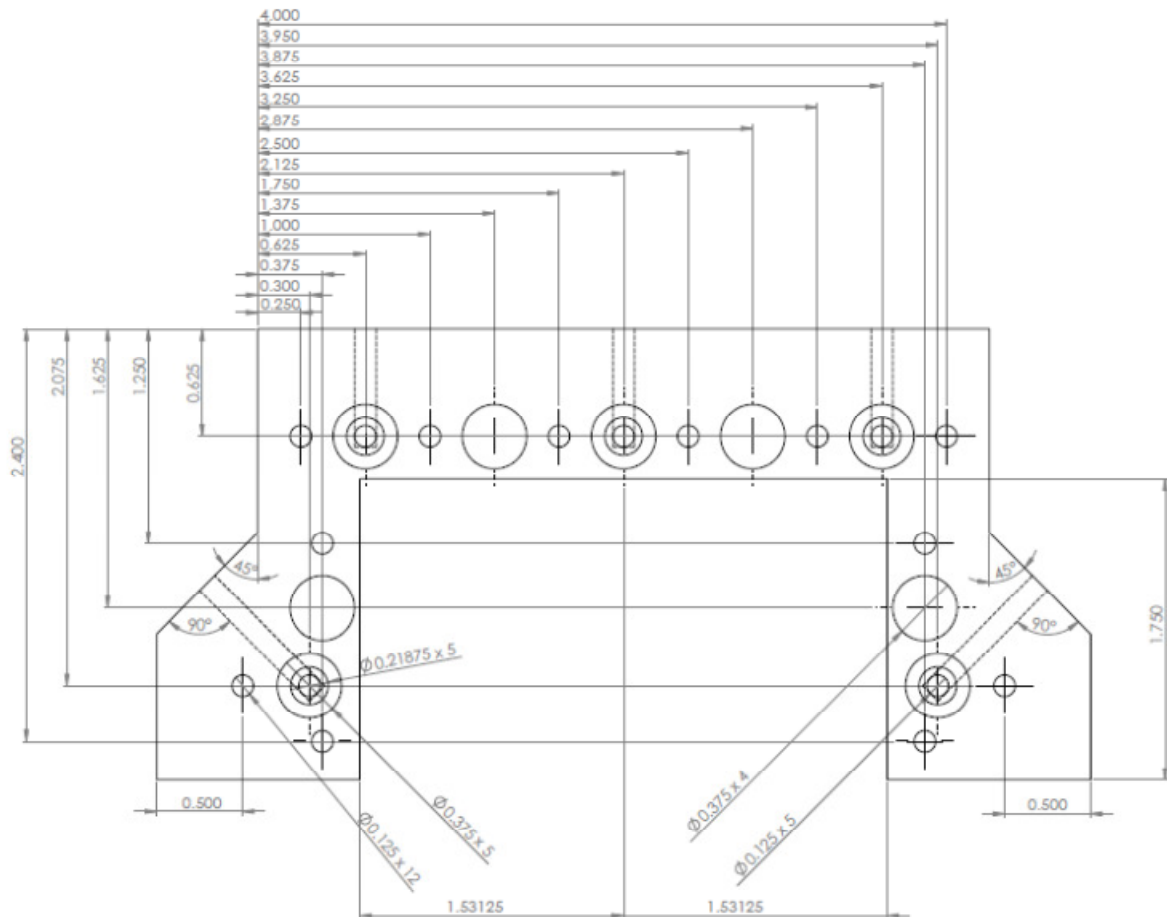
Front view of part 1 of the reference electrode fixture. Dimensions are in inches.
